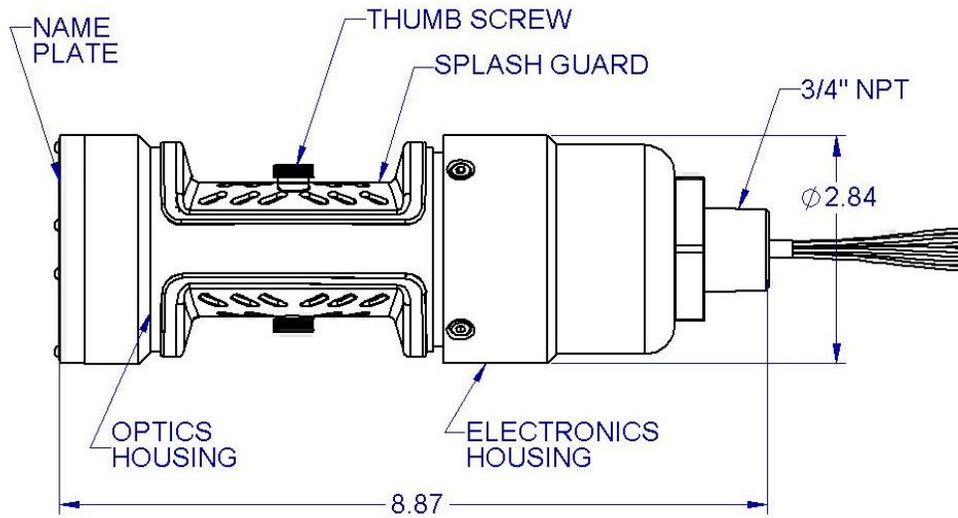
Outline and Dimensional Drawing, IR700, inch measurements
